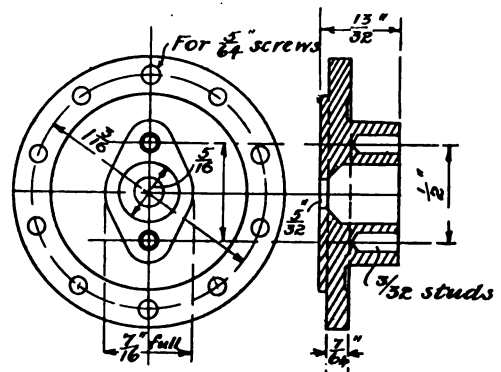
LOW-PRESSURE BACK CYLINDER COVER.
